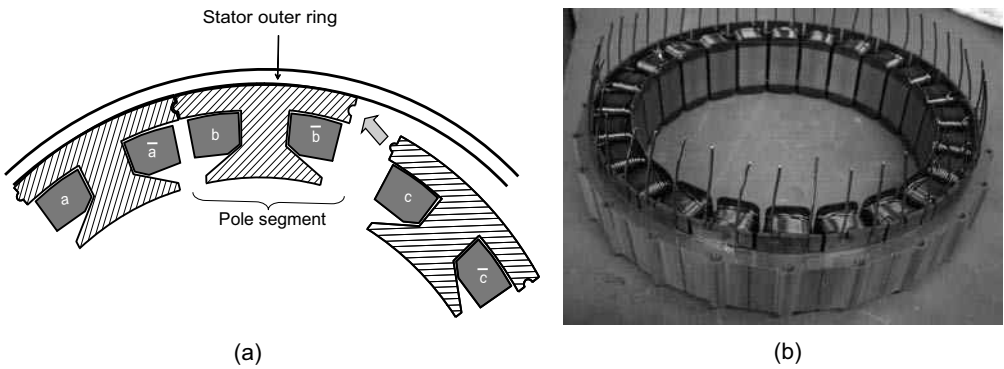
(a) Segments assembly with concentrated winding and (b) an assembled stator (Hyundai Motor Company).
